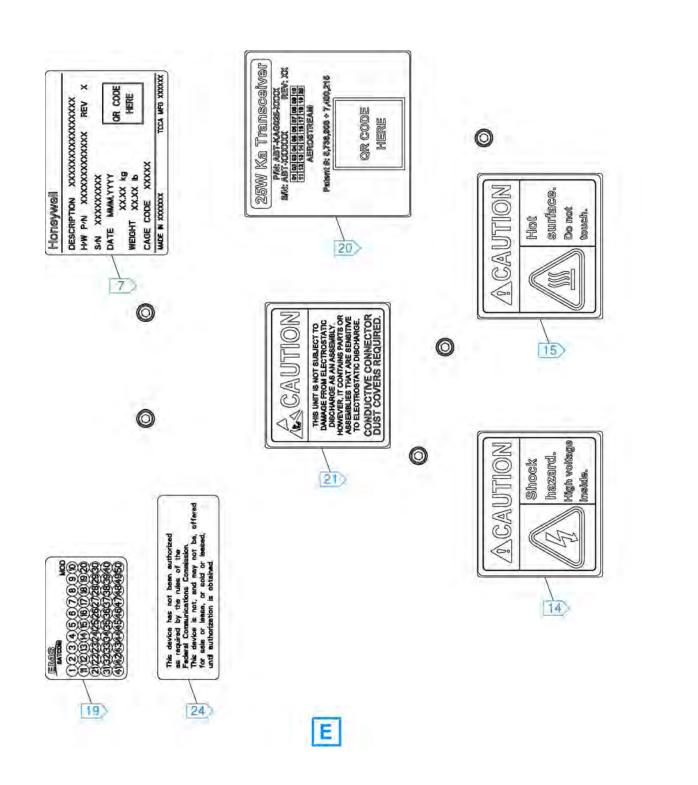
(Sheet 7 of 9) KRFU, Conduction-Cooled 1, Outline and Installation Drawing (90401573, REV F)
